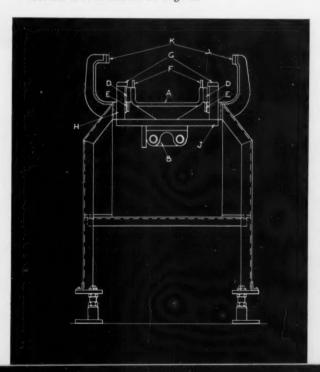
Turnover fixture built into transfer machine for rotating the V-8 engine blocks through 180-degrees in a vertical plane to position the cylinder faces up for subsequent machining operations.
